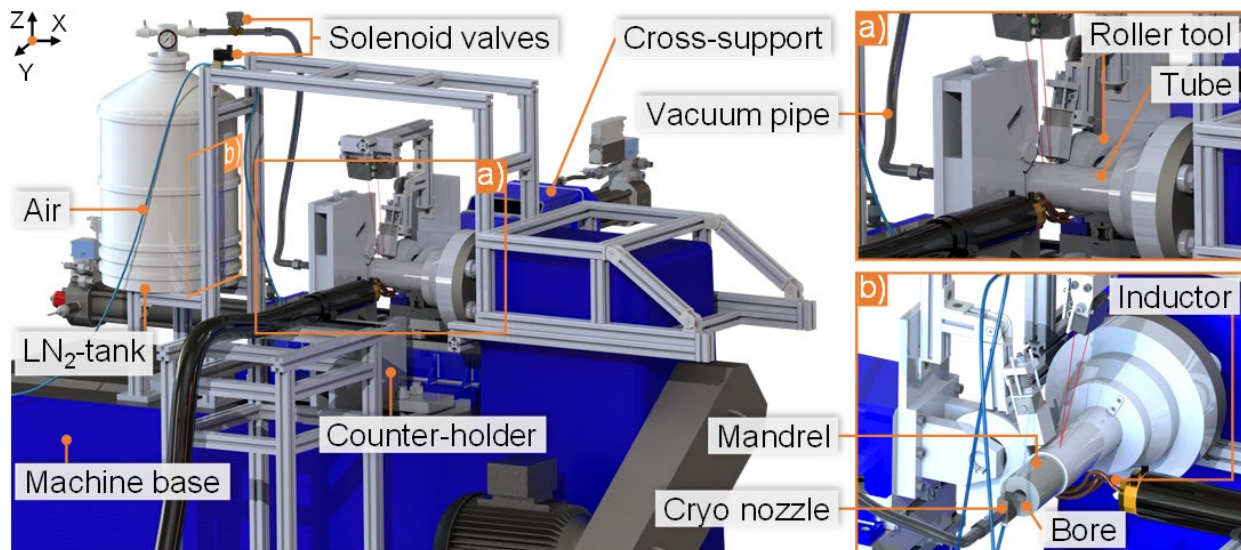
Machine and actuator configuration with a) and b) showing different viewing angles.
